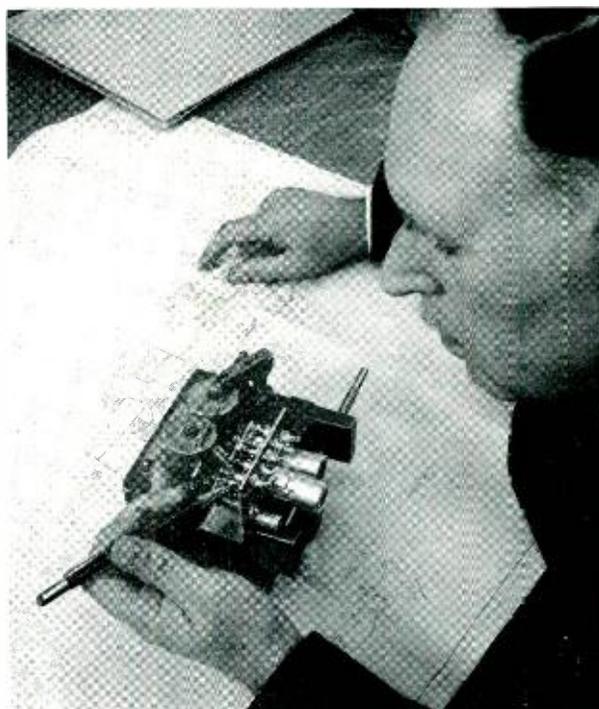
K. F. Rodgers, who did the mechanical design of the local oscillators, checks the wiring on an experimental unit.
